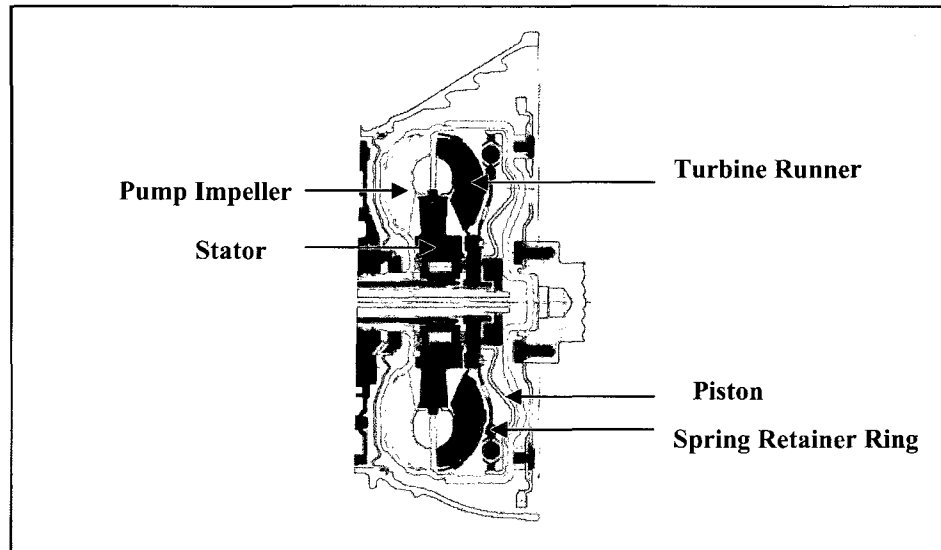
Schematic diagram of a torque converter assembly including the stator, impeller, turbine, spring retainer ring, and torque converter piston. *Courtesy of Chrysler LLC, Auburn Hills, Michigan U.S.A.
